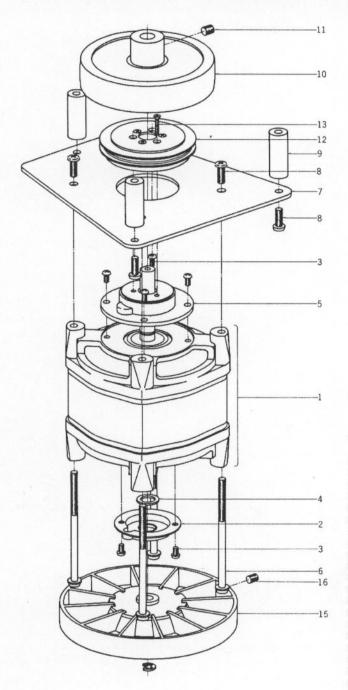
ILLUSTRATION OF TW HEAD BLOCK
